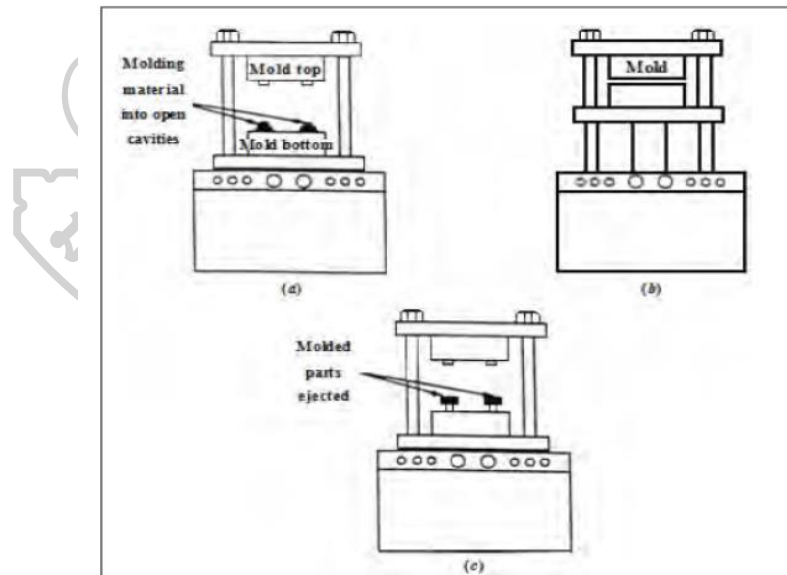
Compression molding sequence: (a) molding material is placed into open cavities, (b) the press closes the mold, compressing material in the hot mold for cure and (c) the press opens and molded parts are ejected from the cavities [30].
